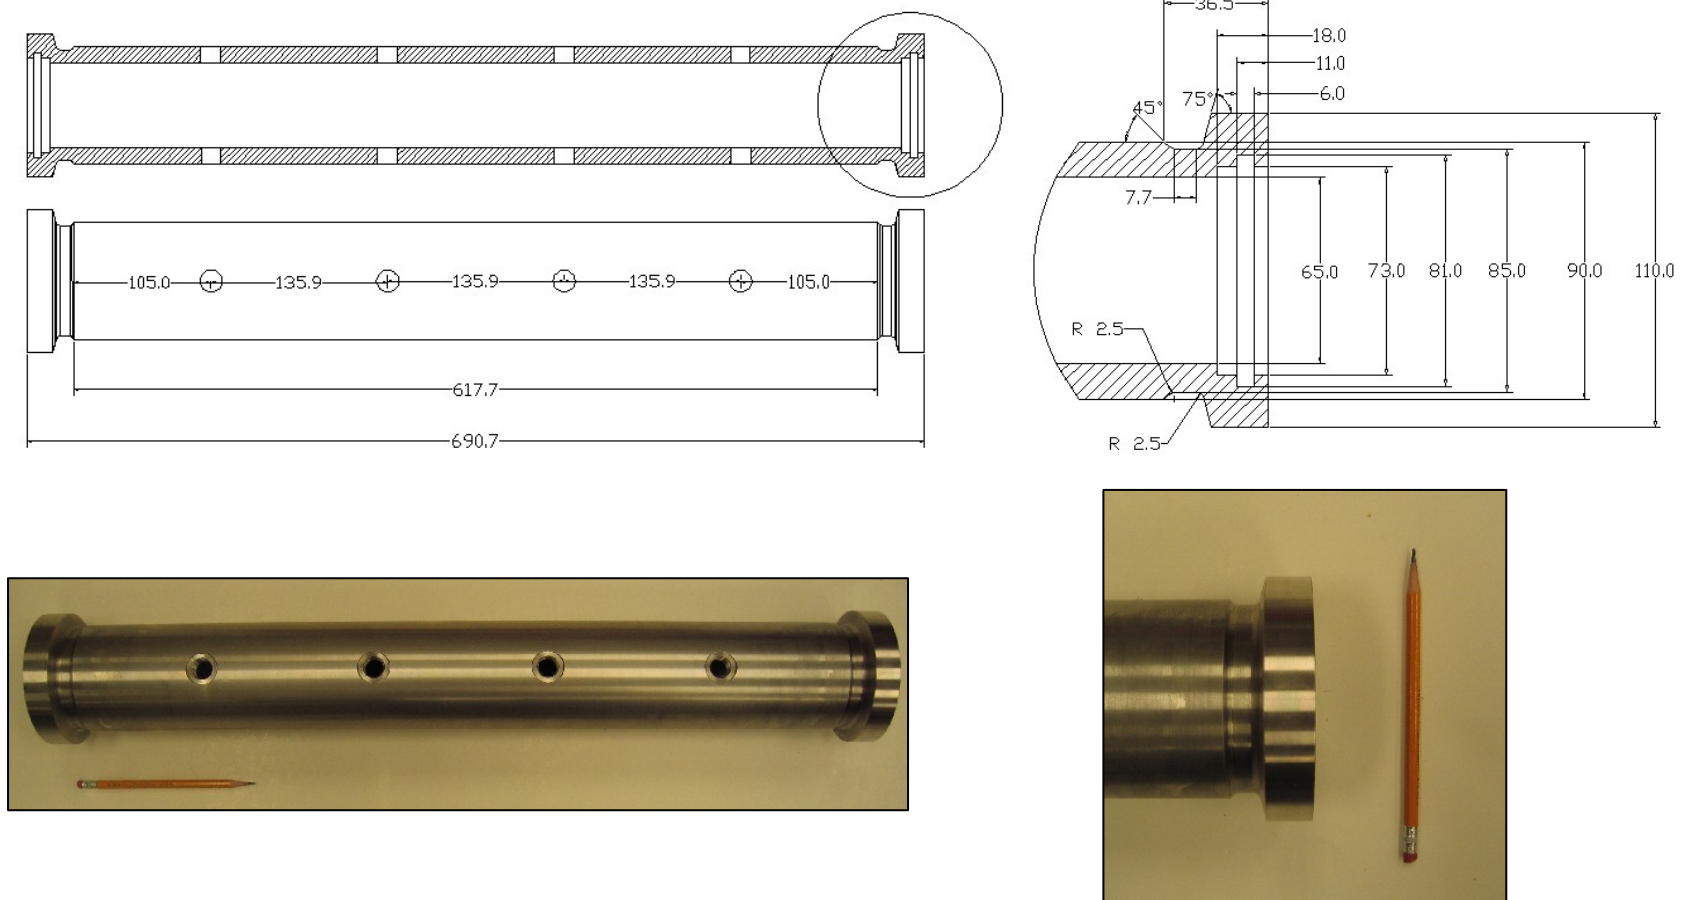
The high pressure chamber (without instrumentation ports). End flanges are designed to attach to storage and extension chambers with quick clamps (all dimensions in mm).
